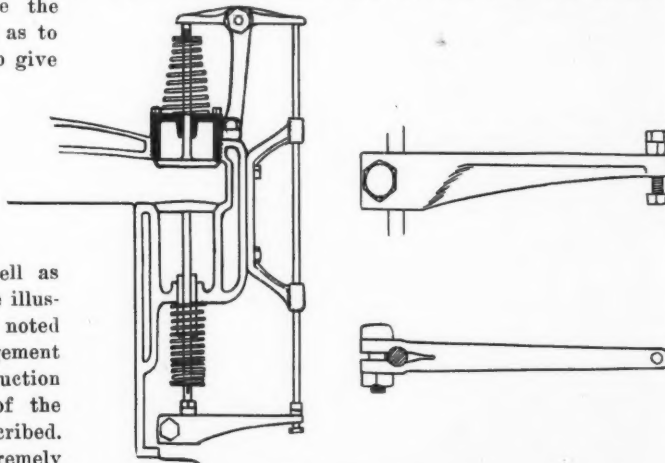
This shows how a specially constructed valve cap can be used in the capacity of a valve chamber. There must, of course, be some arrangement for attaching an exhaust pipe to the separate plugs. This would not be possible on all makes of engines. The detail at the right shows the tappet extension for operating the overhead valves from the main tappet. The end of this extension is fitted with an ordinary bolt with nut and locknut for adjustment purposes
